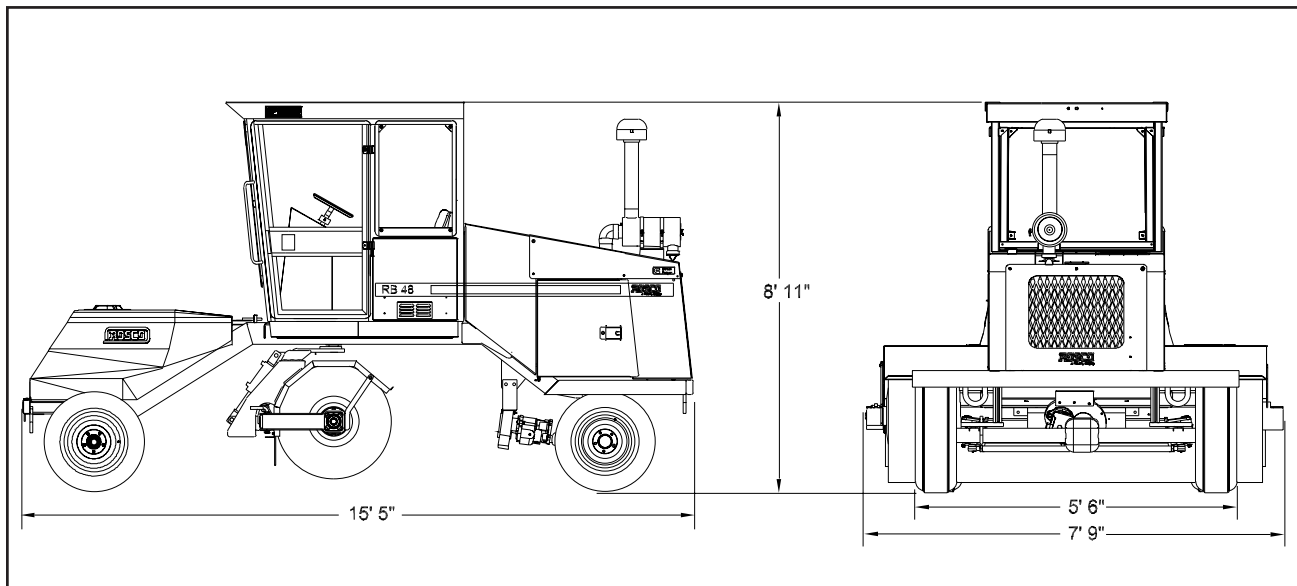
OUTLINE DIMENSIONAL DRAWING
